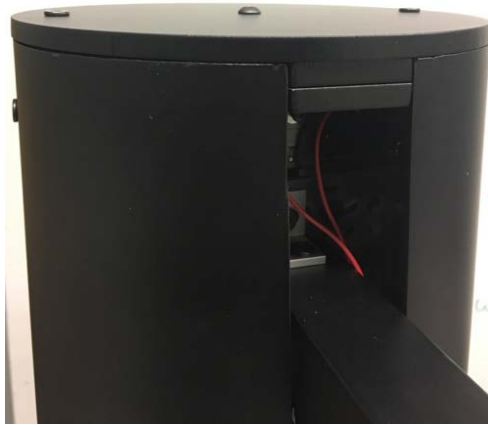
ROTATING TOWER HOUSING CAP AND CYLINDER MATE
